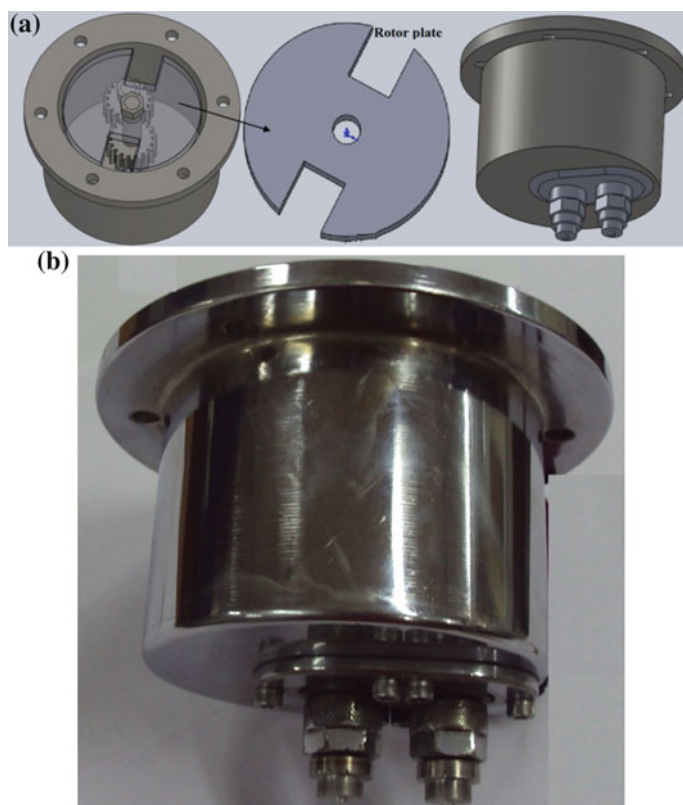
a Pictorial representation of twin tool (both *front* and *top* view), b actual photograph of twin-tool
